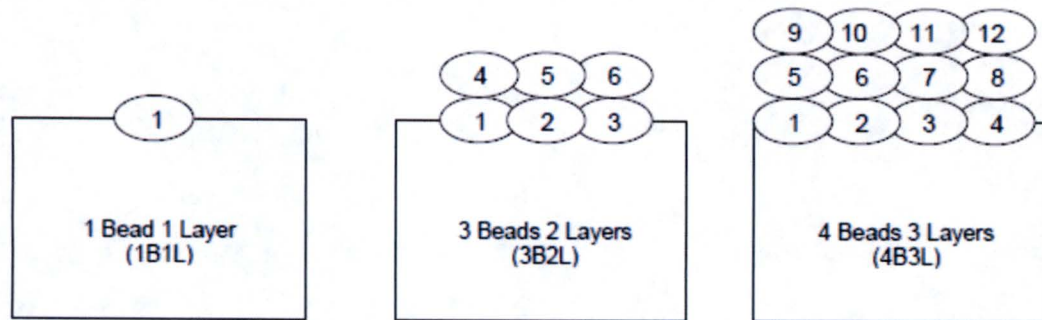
Bead-on-Plate/Bead-on-Pipe Configuration with Typical Bead Placement [5]
